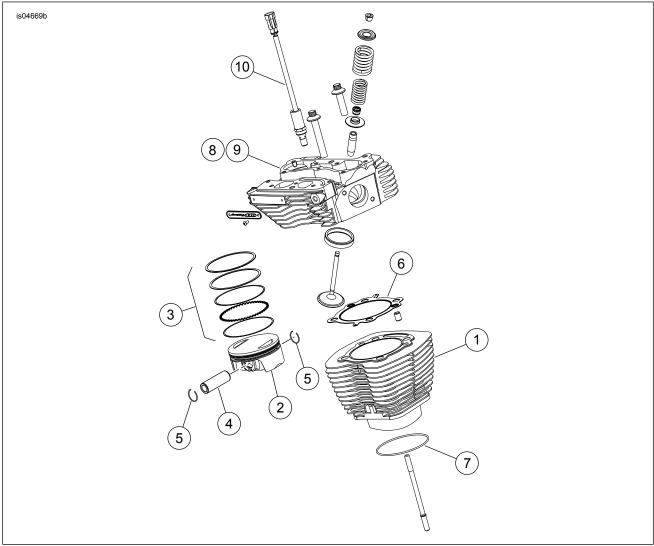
Service Parts: Screamin' Eagle Twin Cam 110 (1800 cc) Conversion Kit
